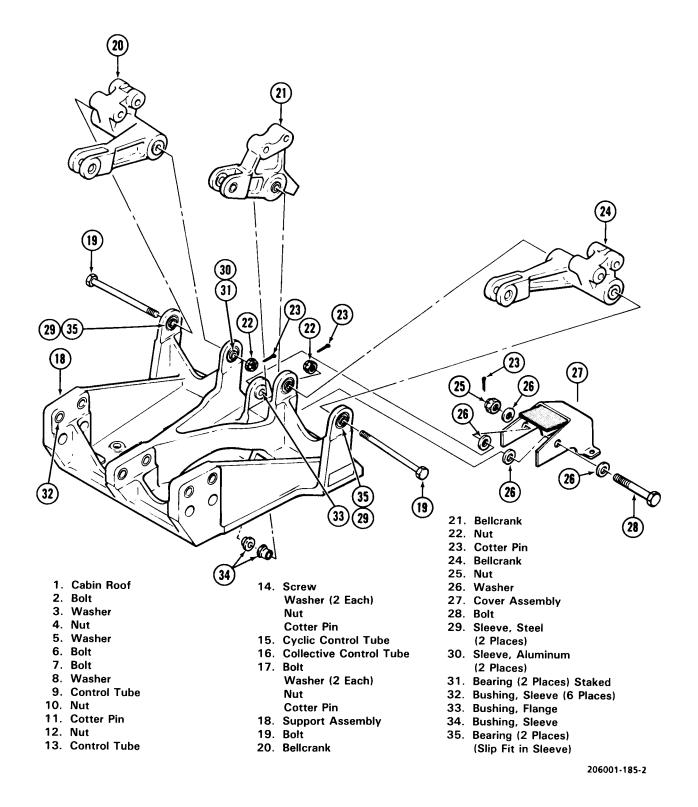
Servoactuator Support Assembly Installation (Sheet 2)
